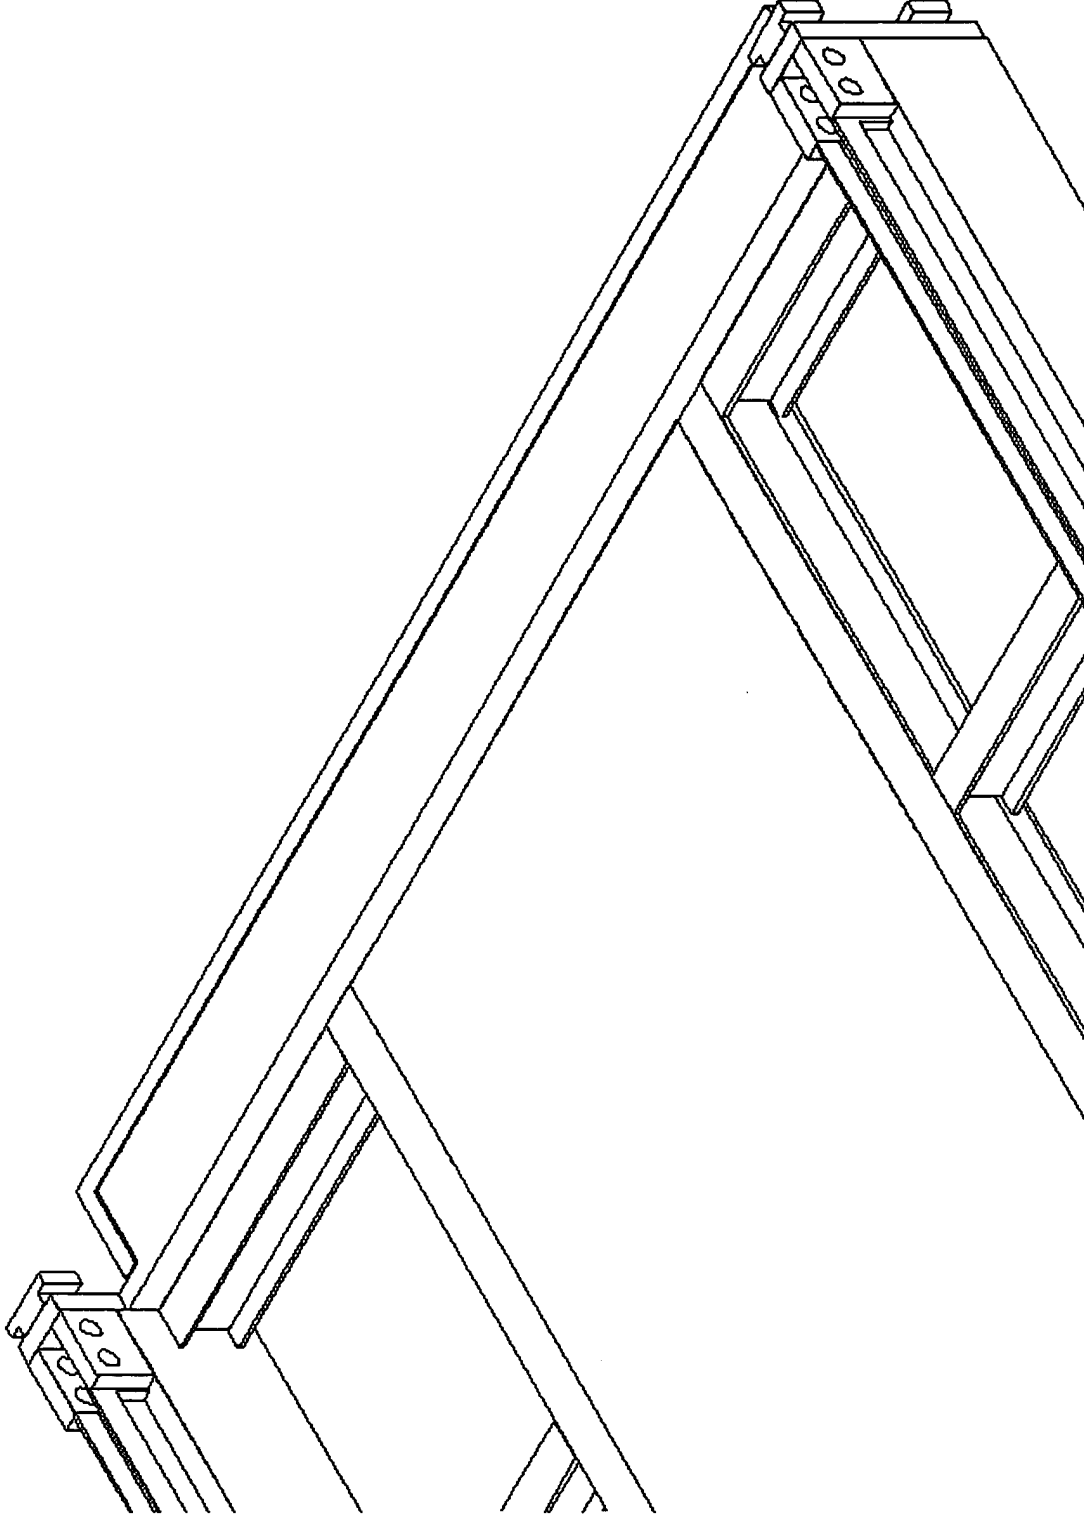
A: Isometric view of the left end of the floor frame (40 foot collapsible cargo container)
